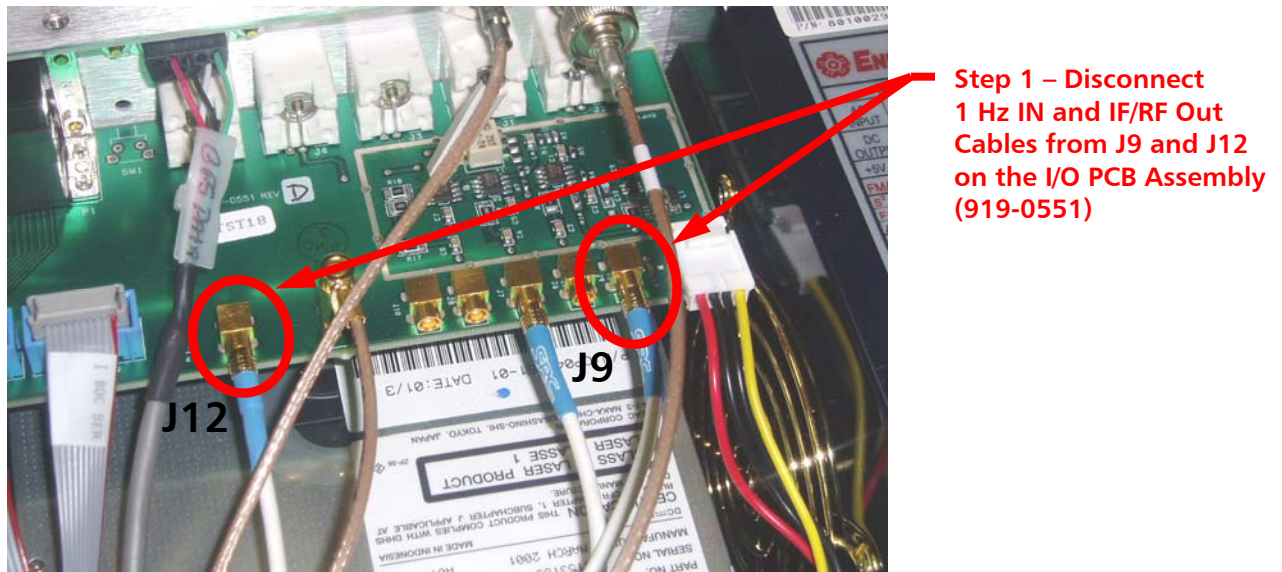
Disconnect 1 Hz IN and RF/IF Out Cables from I/O PCB Assembly
